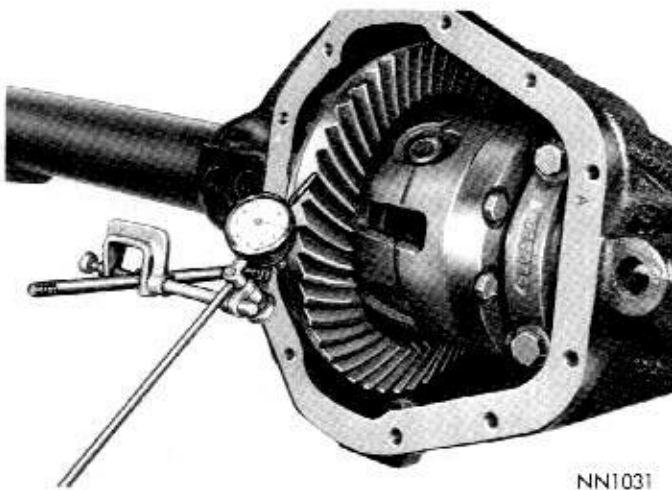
Checking Backlash Between Drive Gear and Pinion
